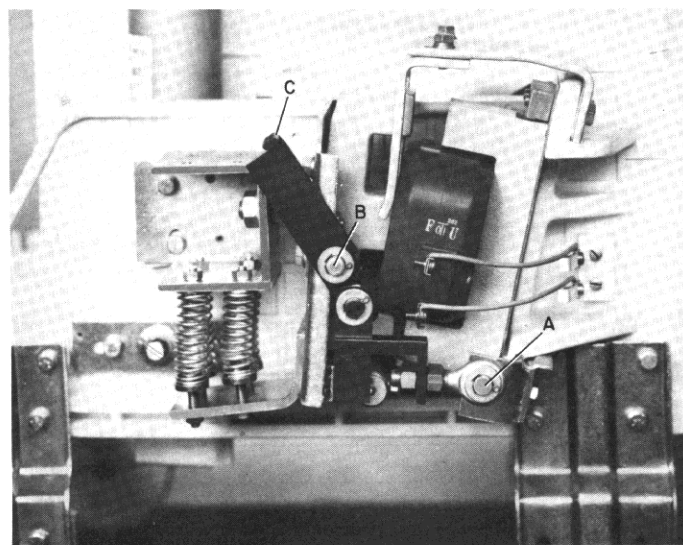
Coil replacement Step 1 and Step 2 — removal of cotter pins, flat washers, and amplifier assembly
